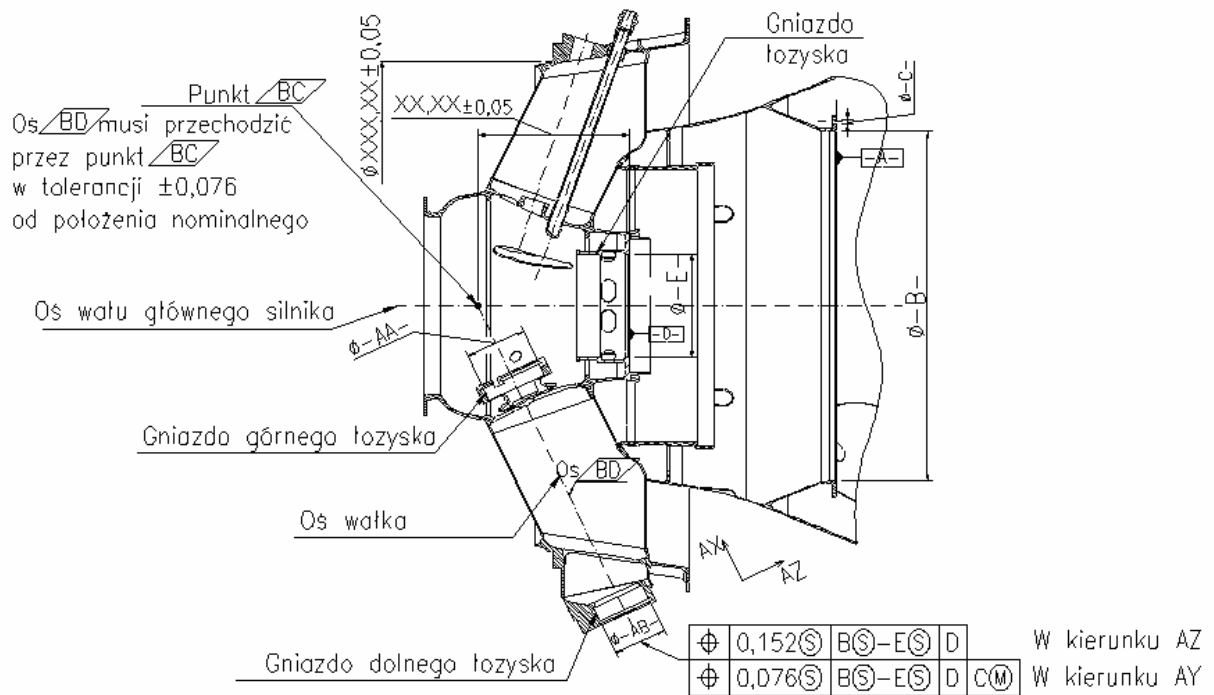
Intersection of turbine engine compressor case assy with main dimensional and geometrical characteristics
